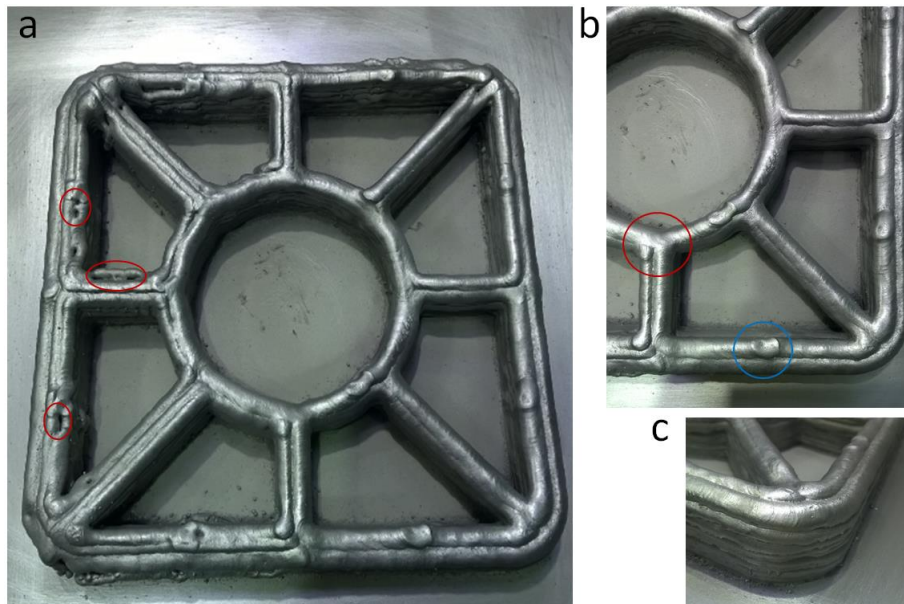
Experimental results. (a) Near-net shape of the produced aluminium component. (b) Details of crossings and start/stop sections. (c) Details at a corner.
